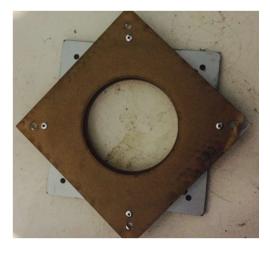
Front View of Lazy Susan Bearing with Acrylic Plates
